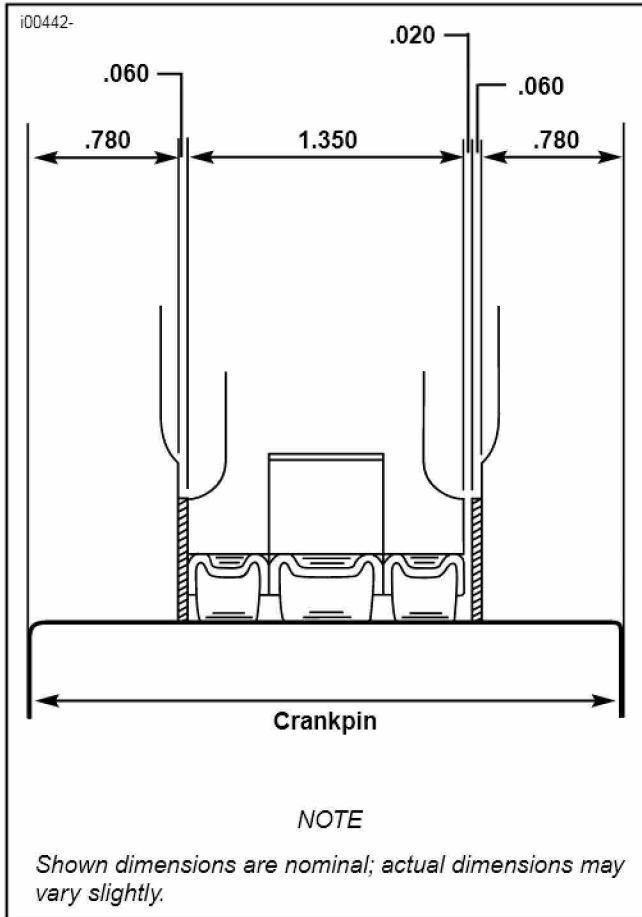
Connecting Rod and Bearing Assembly (1989 and Later)
